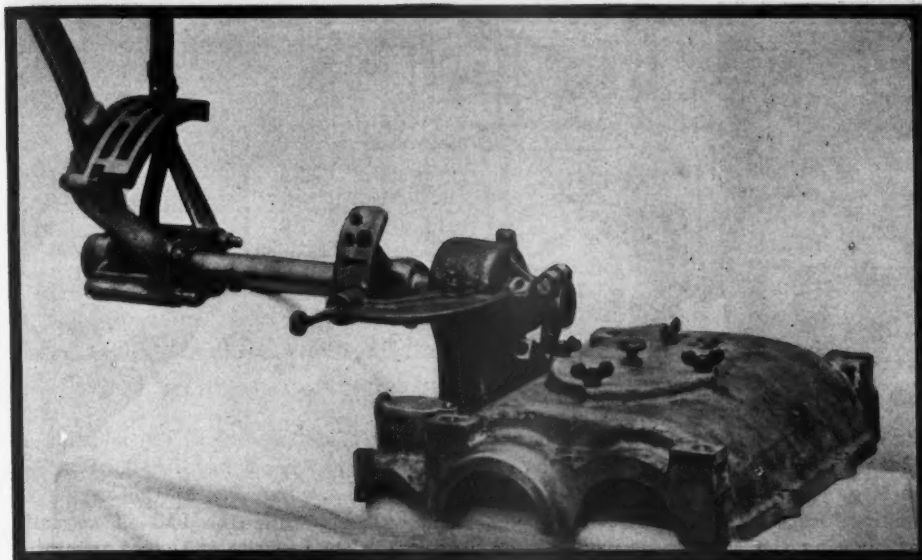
GEARSHIFTING MECHANISM OF PIERCE-ARROW
